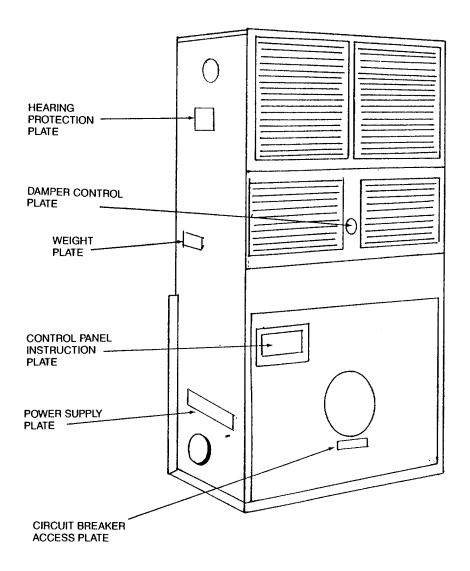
Decals and Instruction Plates (Sheet 1 of 2)
